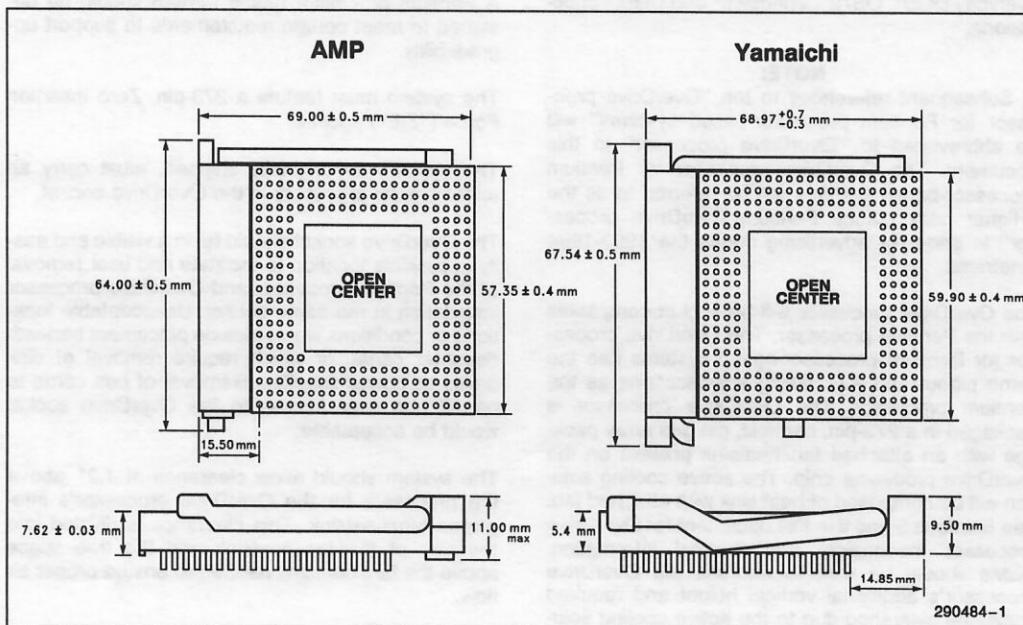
OverDrive™ Socket Footprint Dimensions
